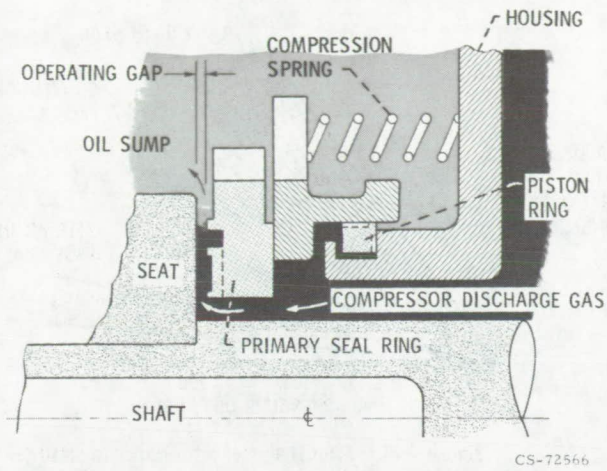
Self-acting face seal showing shrouded Rayleigh step-pad design.
